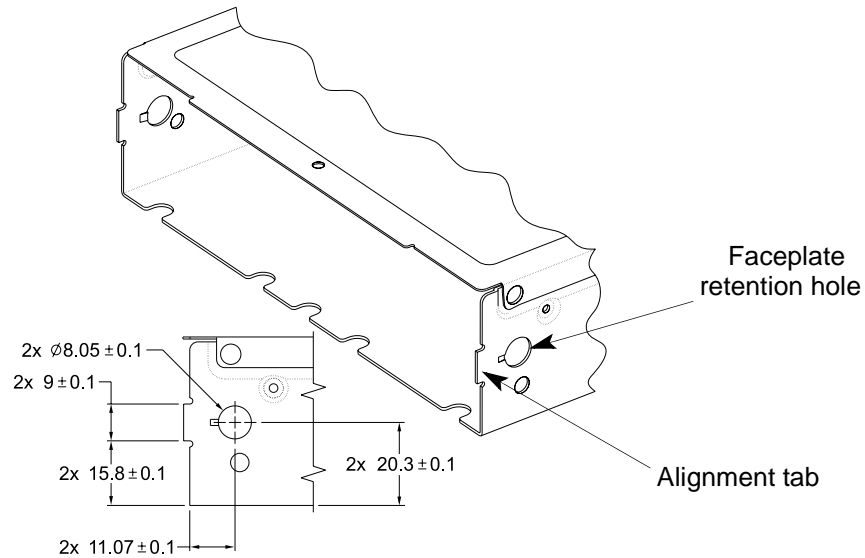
Dimensional locations of the faceplate features in millimeters (side view)
